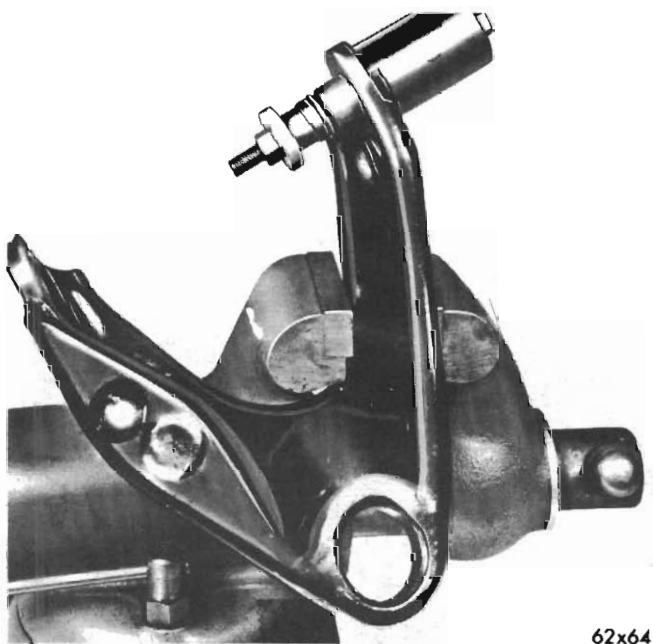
Removing upper control arm bushing (Tool E2C25A)
